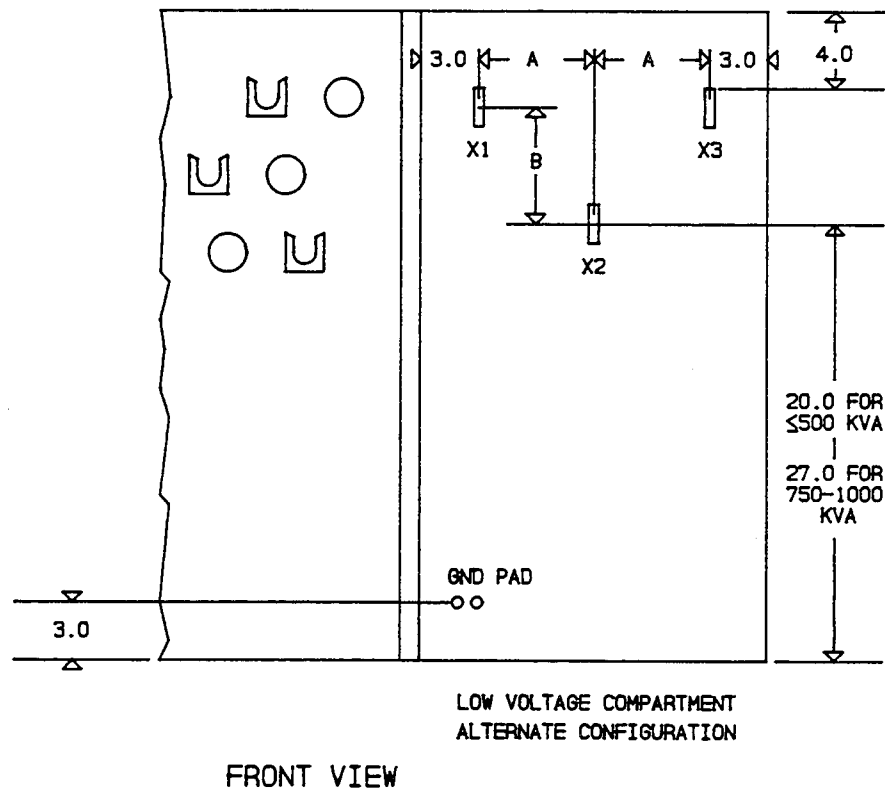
Minimum Dimensions, Type I Transformer (Cont'd)
